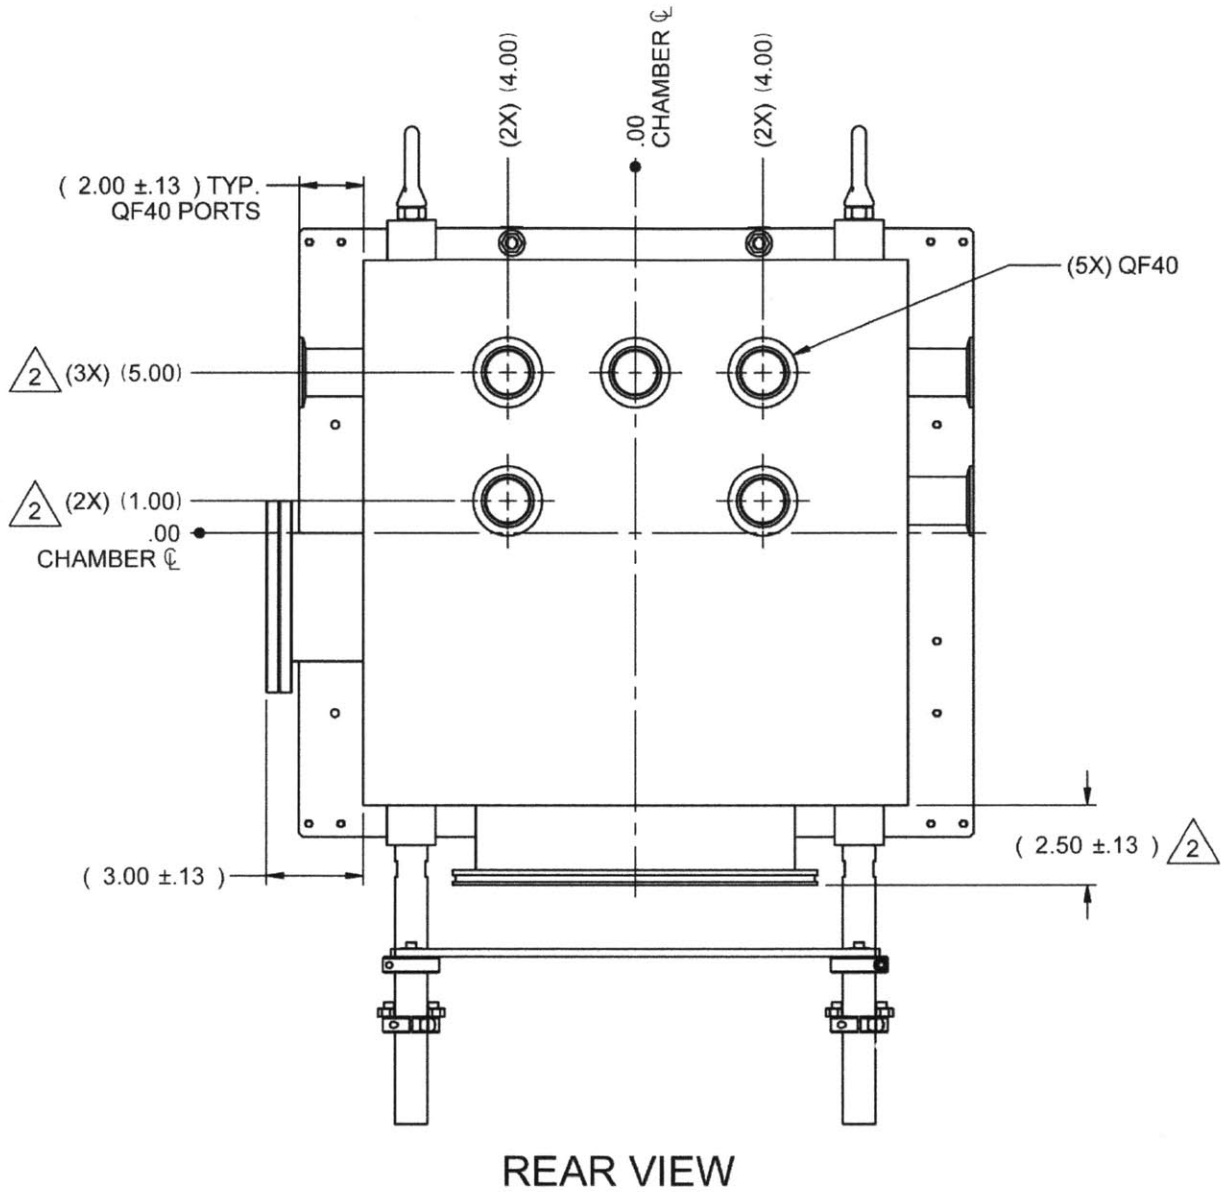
oCVD reactor chamber engineering drawing—rear view. Dimensions in inches.
